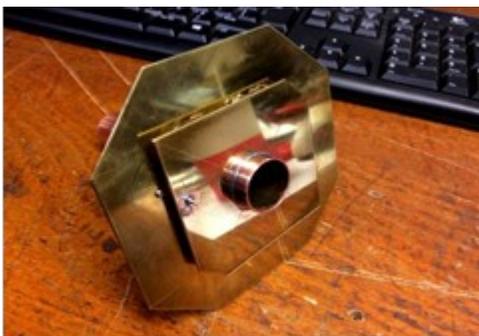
Soldering the patch using 2 x 1.5mm thick aluminium plates as spacers.
